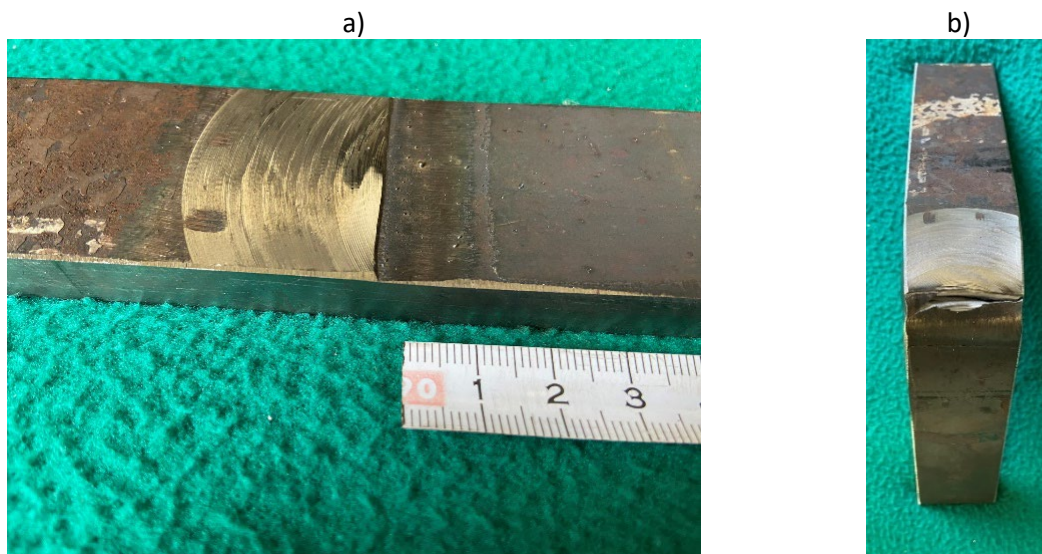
Specimen a) before bend test (visible sharp edge) b) after bend test (visible crack)
